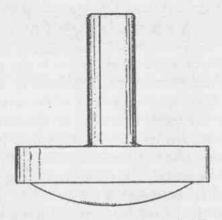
Tool for Imparting the Proper "Dish" to Pouches
